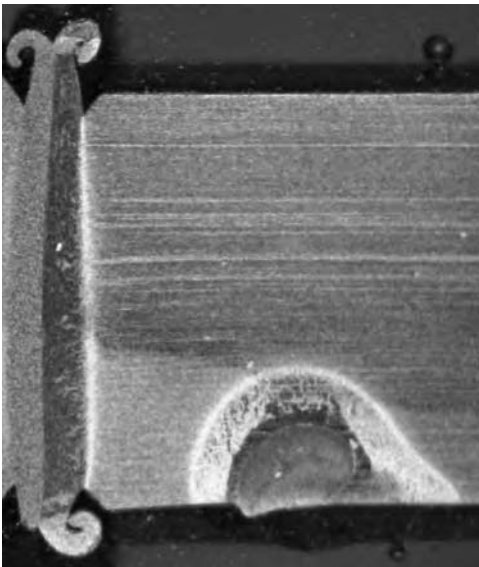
Example of burning of adjacent components due to incidental contact during welding. Courtesy of Edison Welding Institute
